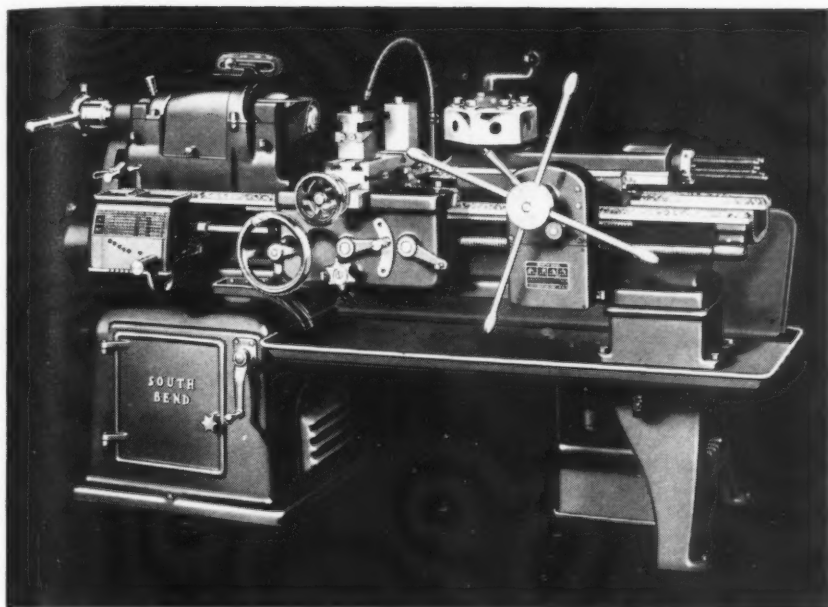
Improved precision turret lathe brought out by the South Bend Lathe Works
